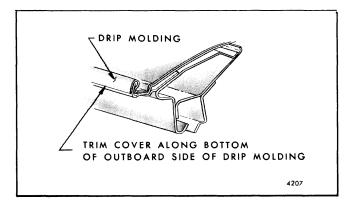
Trimming Fabric Roof Cover at Drip Molding
